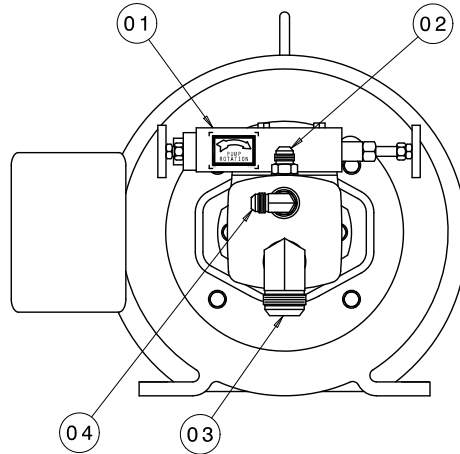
Motor Drive Hydraulic Pump Assembly
